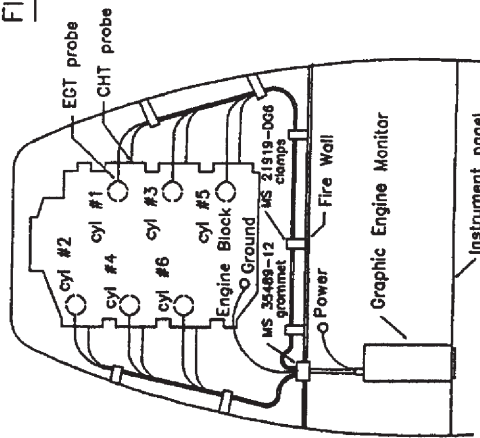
TYPICAL SINGLE ENGINE HARNESS ROUTING
